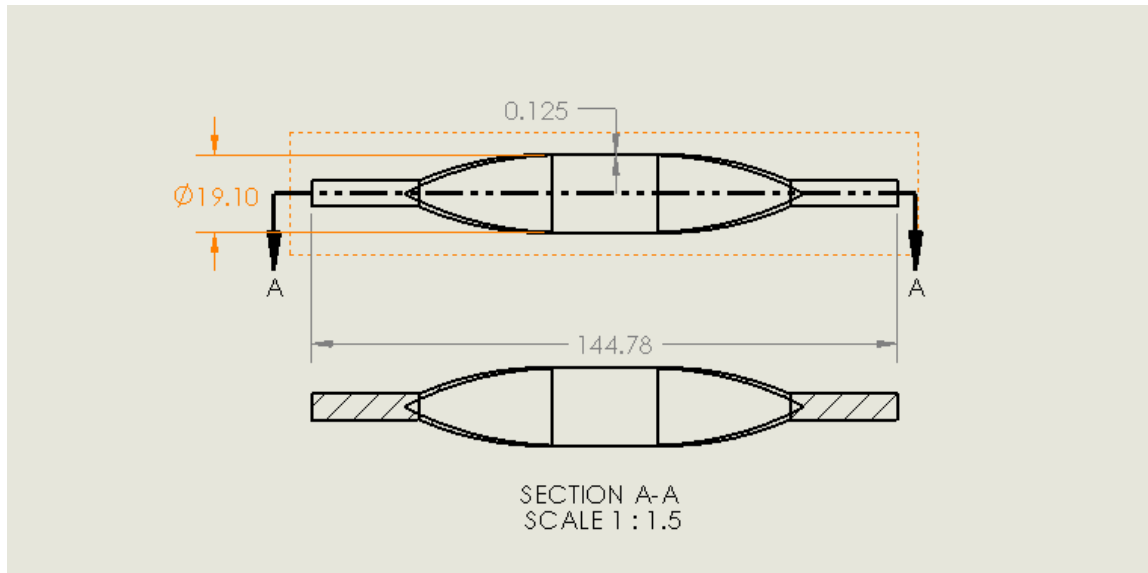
Design 4 of Mag-Lev Shearing device with the shearing gap of 0.125 mm
